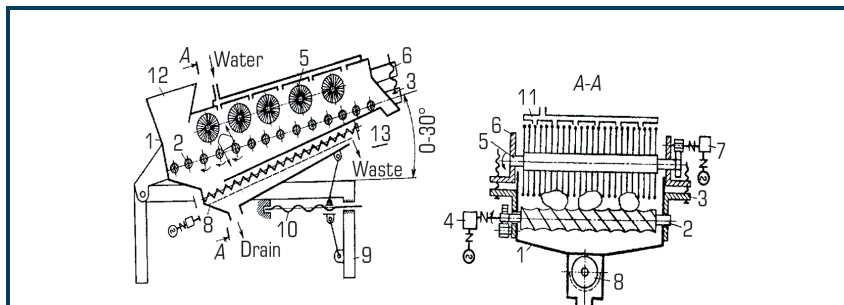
Device for peeling and washing root and tuber crops according to a.p. USSR No. 912131: 1 – bath; 2 – roller; 3, 4 – supports; 5 – drum; 6 – support; 7 – gear transmission; 8 – auger; 9 – frame; 10 – lifting mechanism; 11 – collector; 12 – loading tray; 13 – unloading tray
